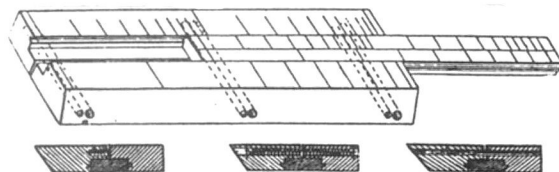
Early schematic of the mechanism of the “Mack Improved Slide Rule” showing pins and springs connecting the upper and lower halves of the stator.
